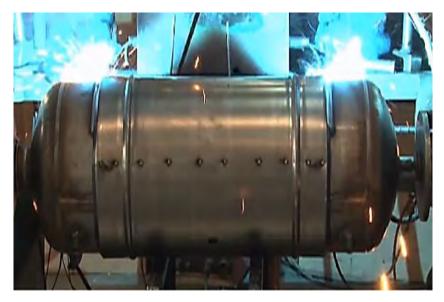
Circular arc welding of double walled rolled sheets
